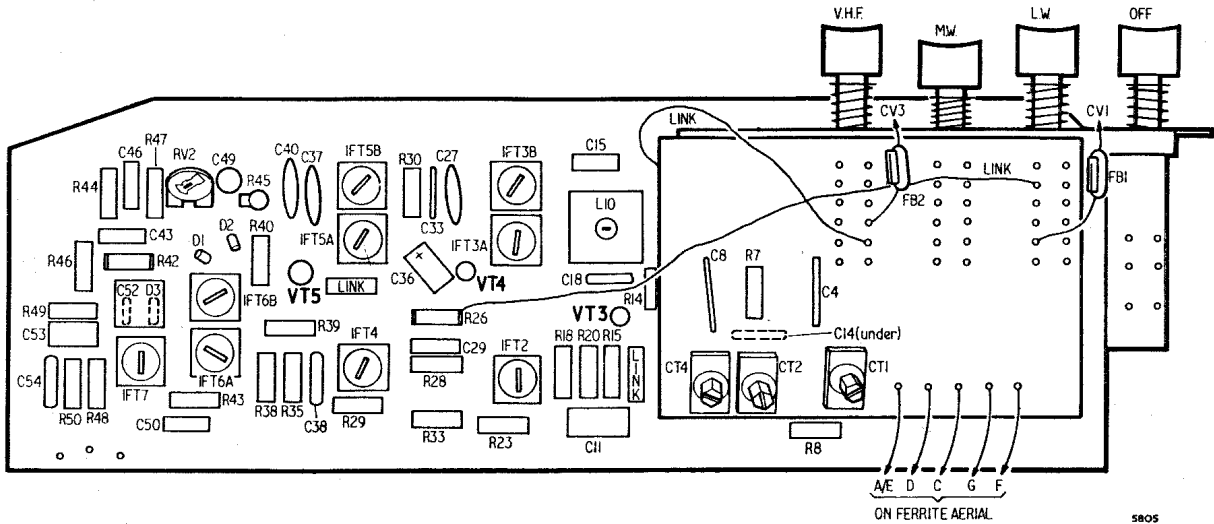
I.F.-R.F. panel (Z120) - component layout
